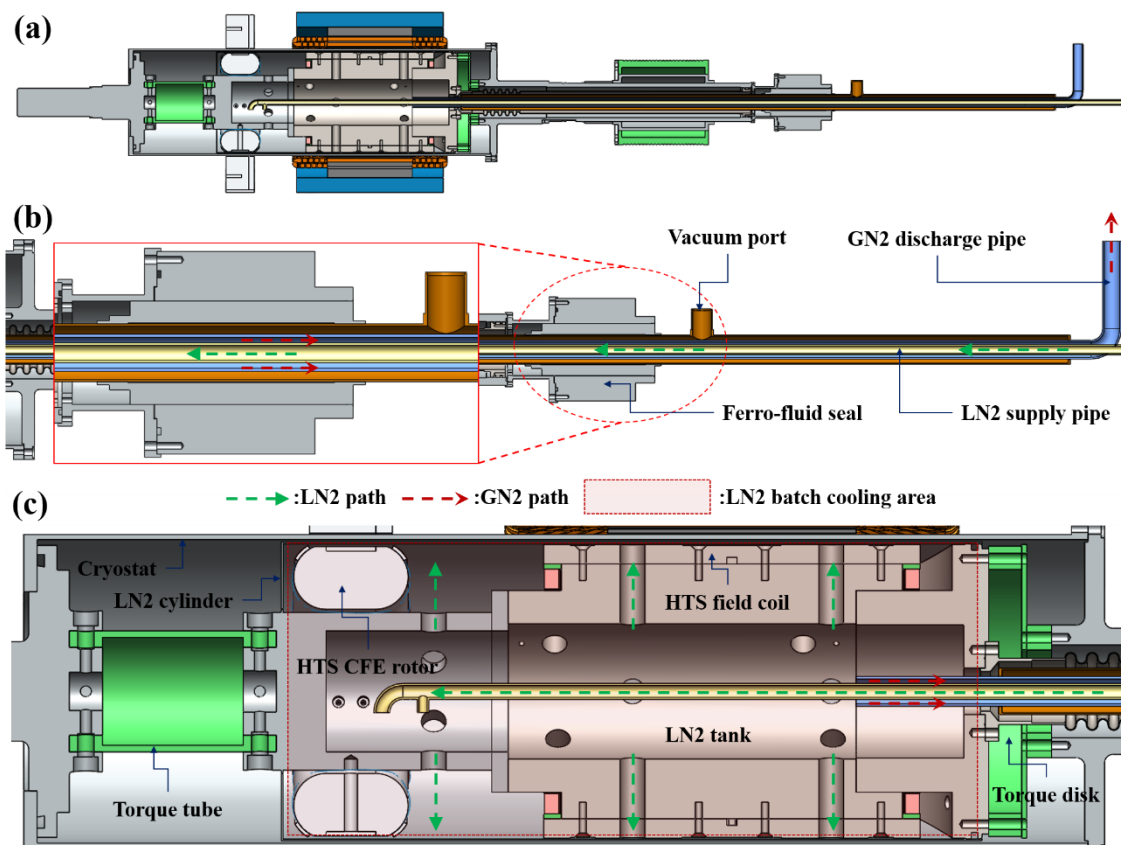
LN2 cooling structure of the 1 kW class HTSG. (a) Overall cross-sectional view of the 1 kW class HTSRM with CSFE, (b) inside view of cryogen transfer pipes, and (c) enlarged inside view of rotor assembled with cooling pipes
